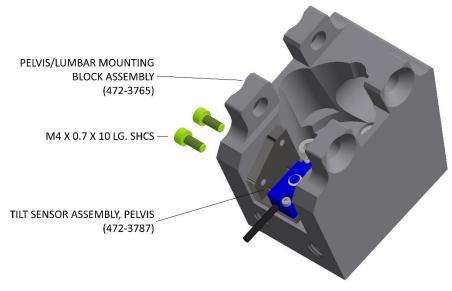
Pelvis/Lumbar Mounting Block Assembly
